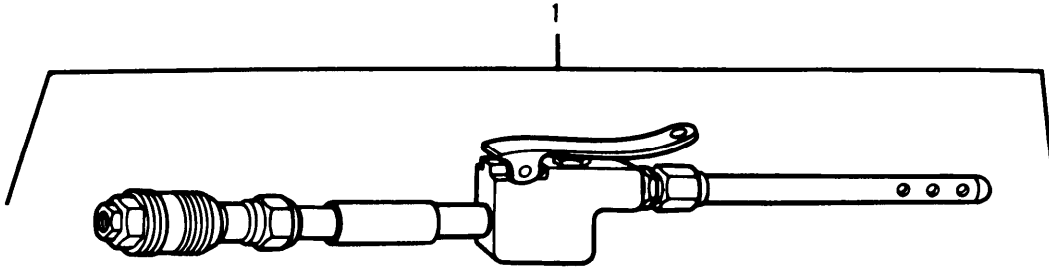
V-PACK CLEANER ASSEMBLY.
